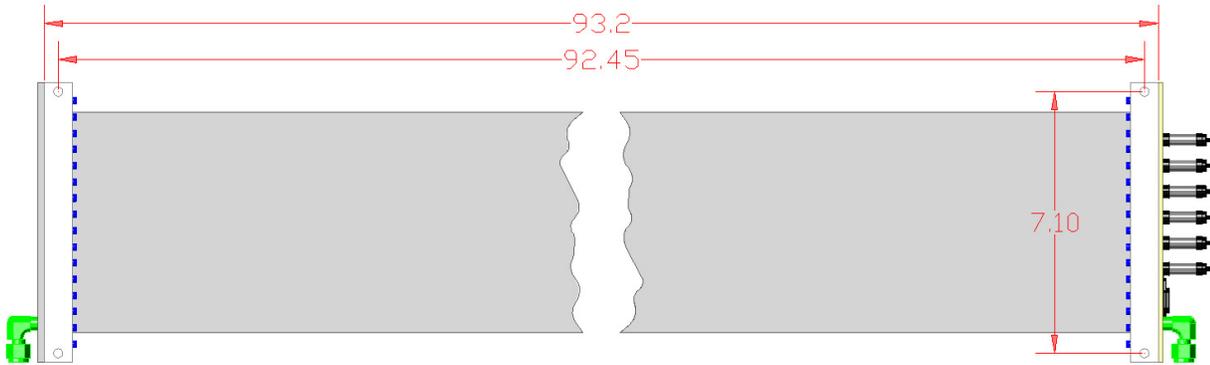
A single ion chamber tube. Each tube is fabricated from 6" by 2" rectangular tubing and contains 9 ion chambers spaced by 10". Endflanges are welded to the tube ends, and endplates with gas and electrical connections are bolted to these flanges. The tubes are mounted using 1/4-20 holes in the endflanges which are indicated.
